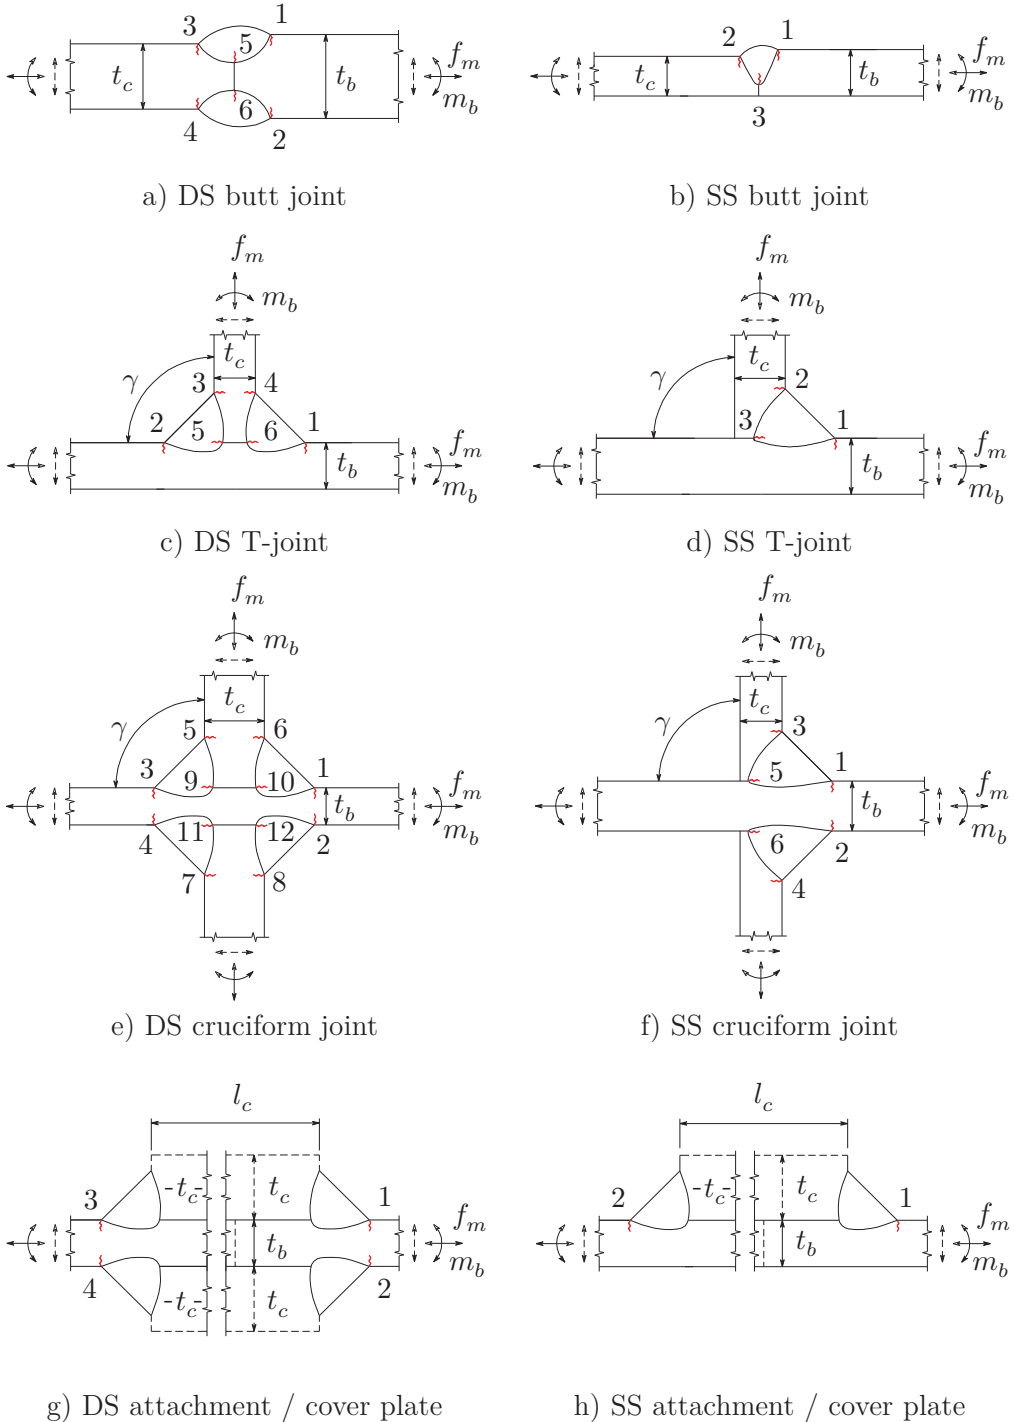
Commonly applied welded joints (incl. mode-I cracks) in hull structures.
